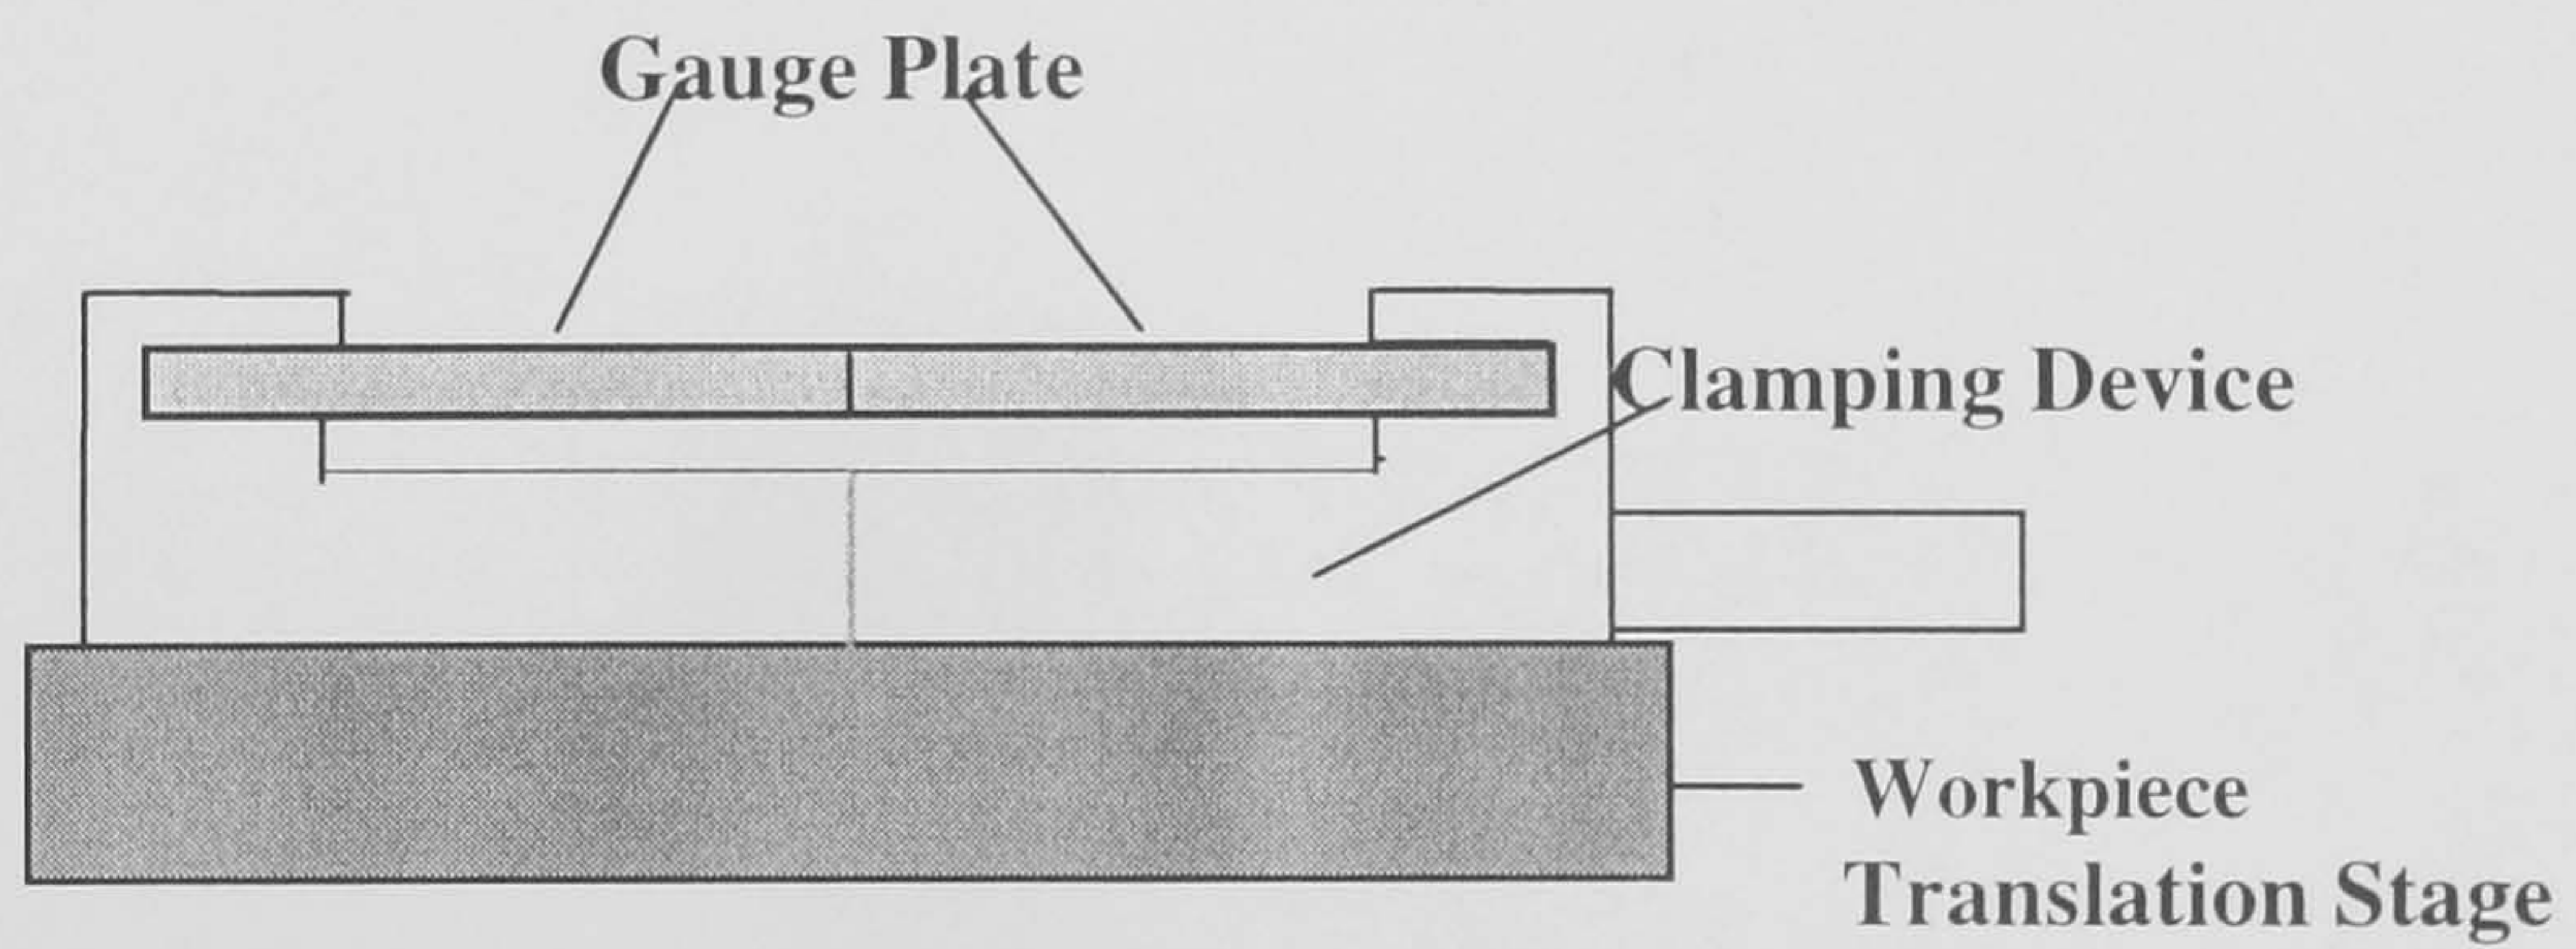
Clamped Geometry For Laser Welding
